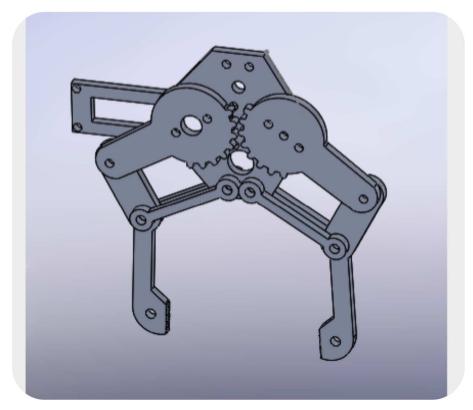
BASIC PINCER DESIGN SOLIDWORKS DRAWING
